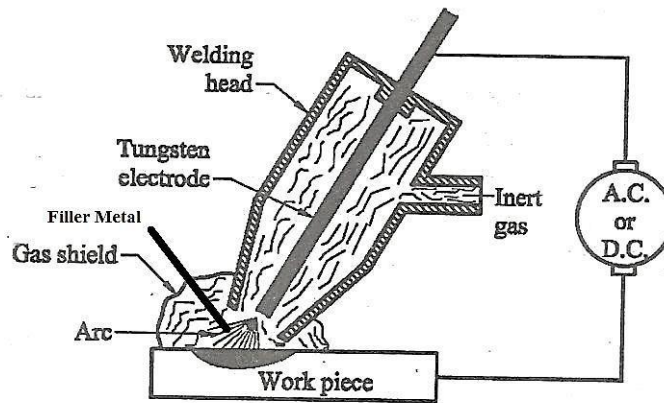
Gas Tungsten Arc Welding Process
